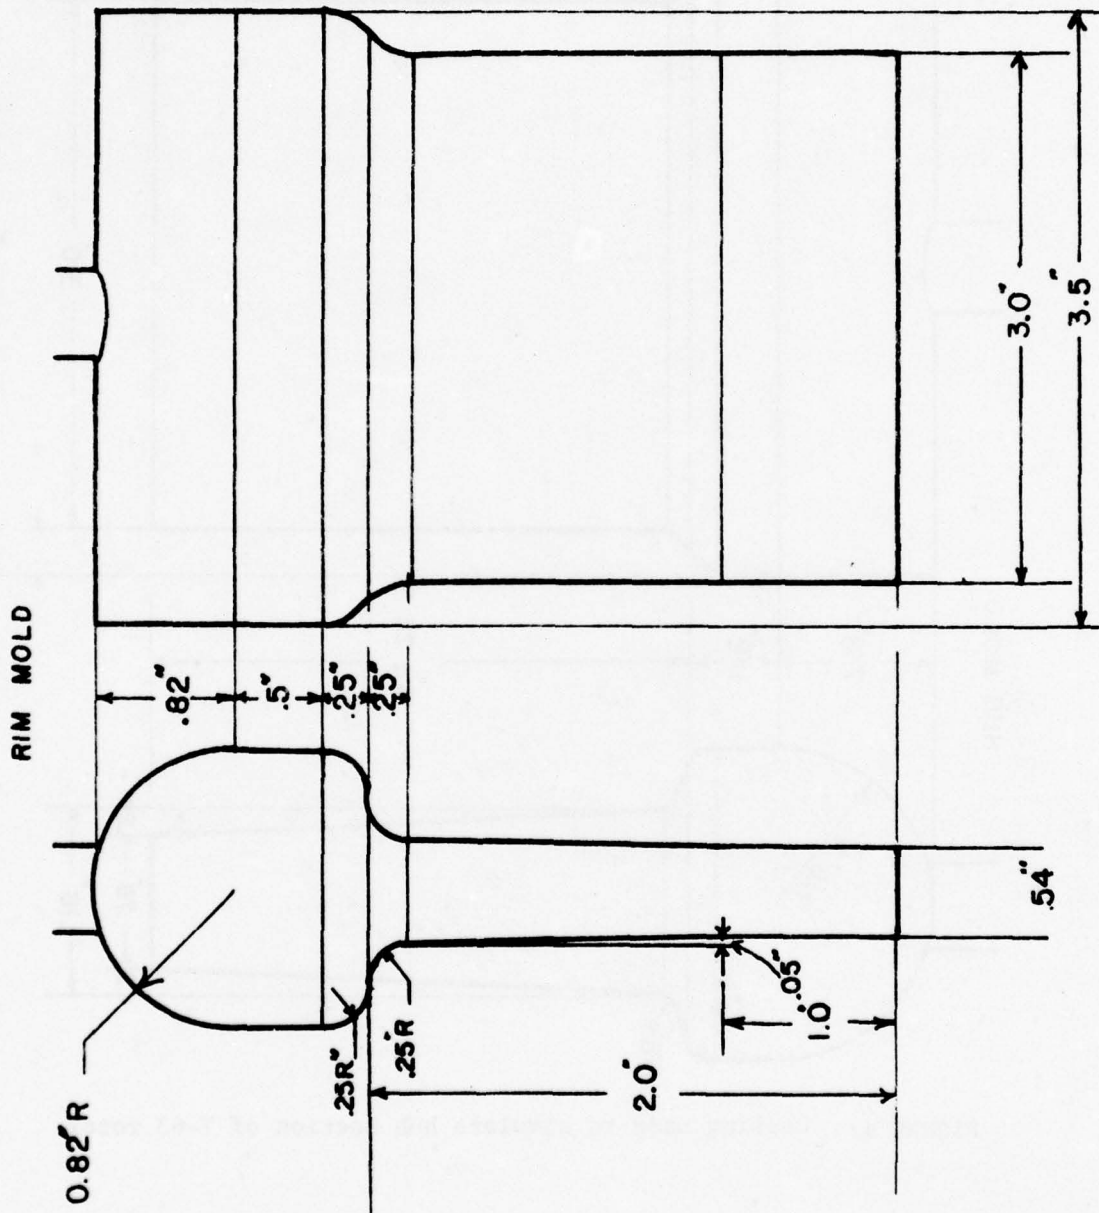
Casting used to simulate rim section of T-63 rotor.
